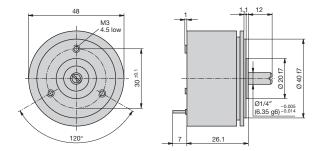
KINAX 3W2 with special drive shaft at front only, Ø 1/4", length 12 mm.
